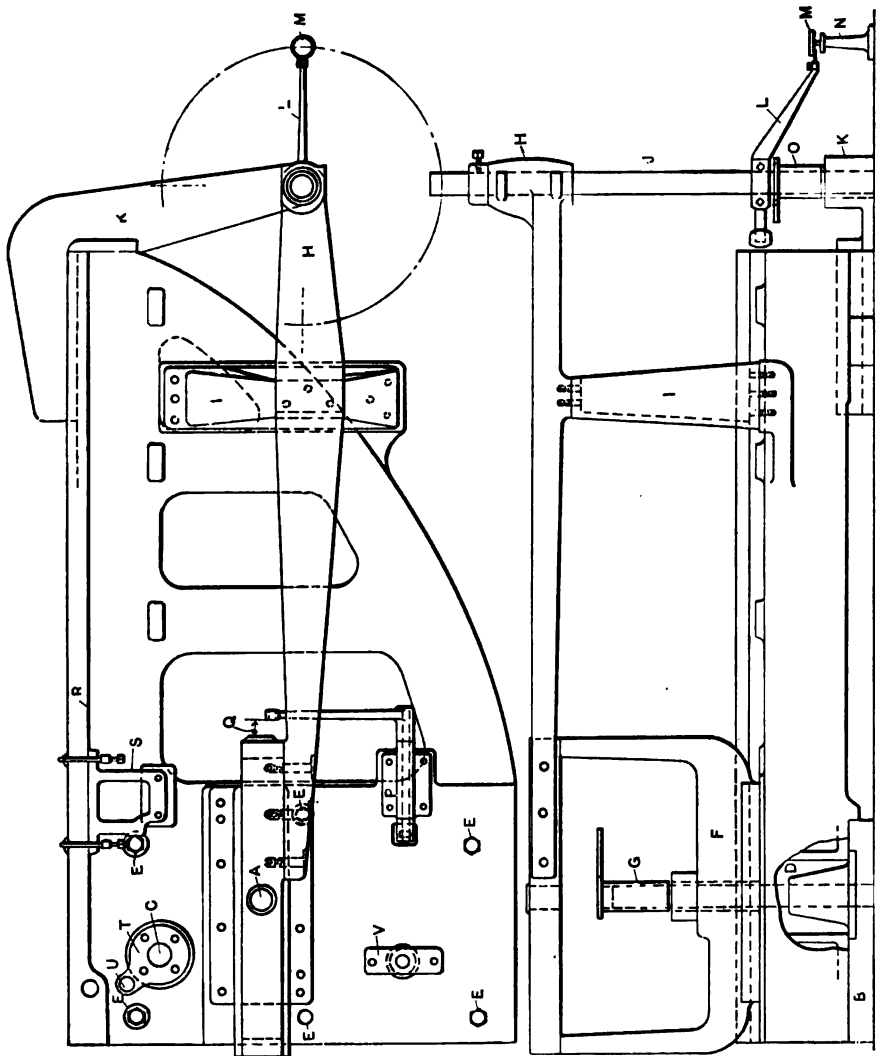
Method of Setting and Laying out Holes for the Driving and Feed Members on the Front Housing
